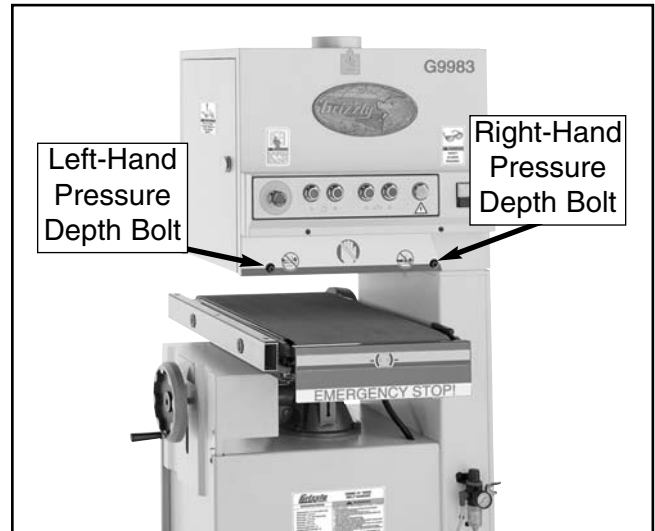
These are the pressure roller depth bolts at the front of the machine. *The rear depth bolts are in the same location at the rear.
